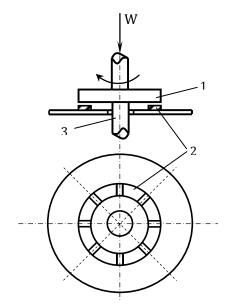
Scheme of the thrust hydrodynamic bearing: 1 - heel; 2 - blocks; 3 – rotor.
